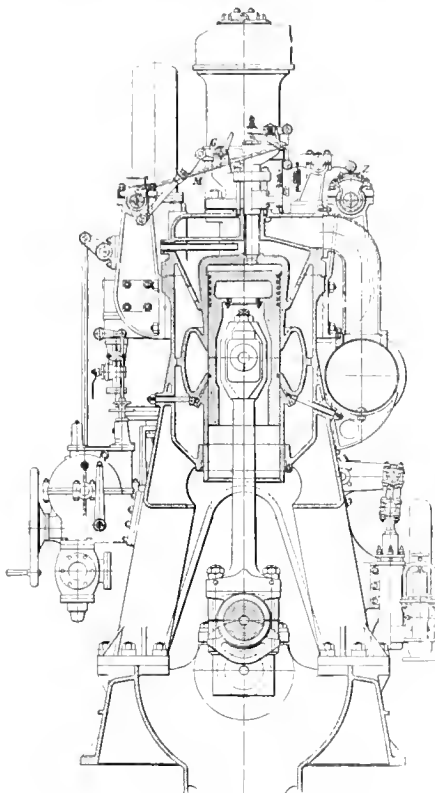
SECTION VIEW OF DIESEL ENGINE.
